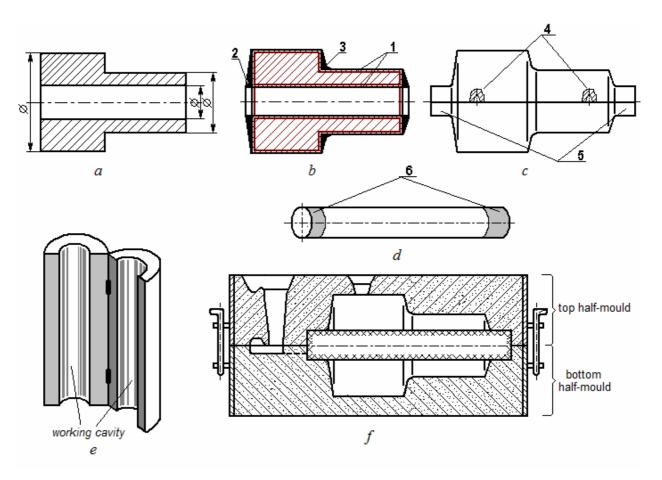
Sequence of casting manufacture: a – part drawing; b – casting drawing; c – pattern; d – core; e – core box; f – complete mould for manufacture of casting
